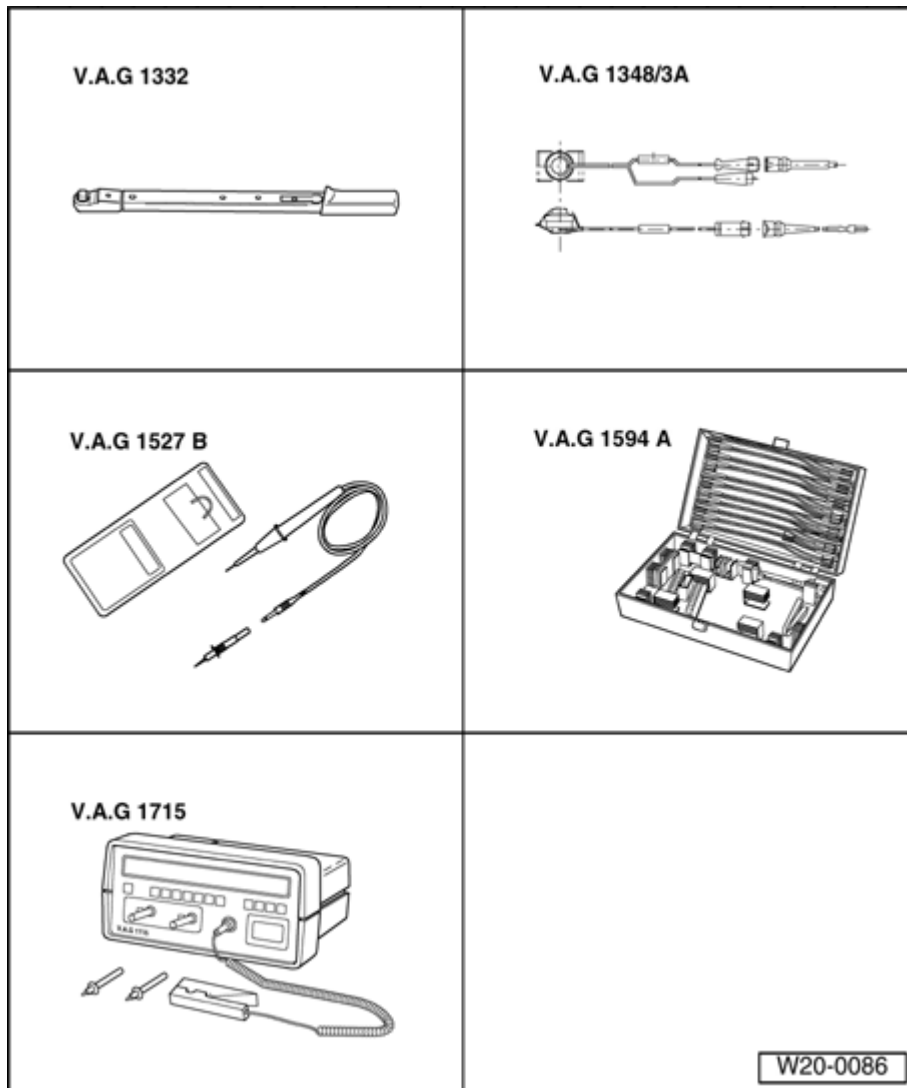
Identifying Special Tools - Fuel Pumps, Checking (2 Of 2)
